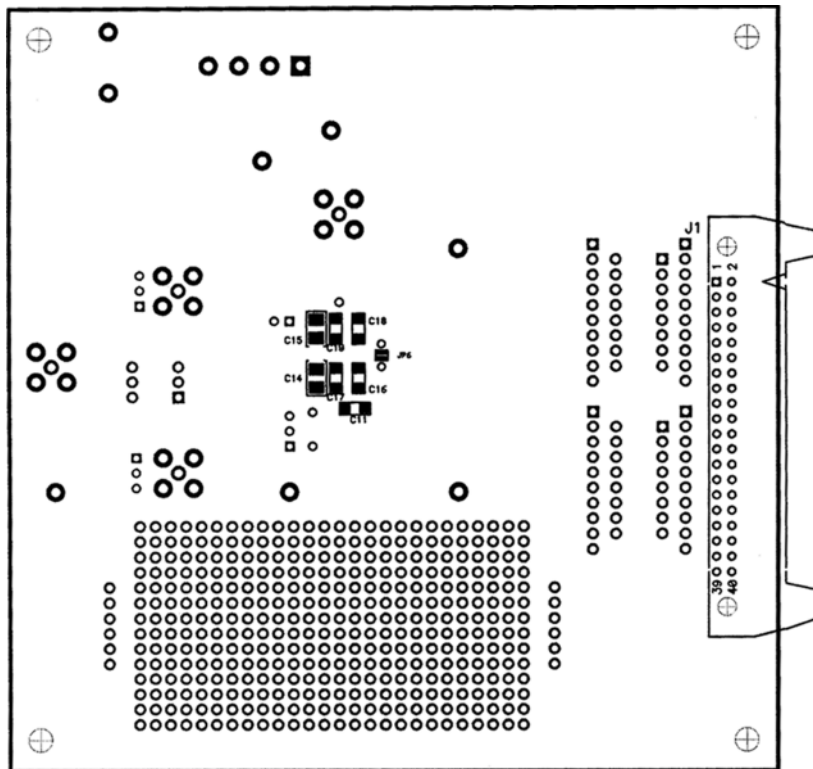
SOIC Evaluation Board Assembly—Secondary Side
